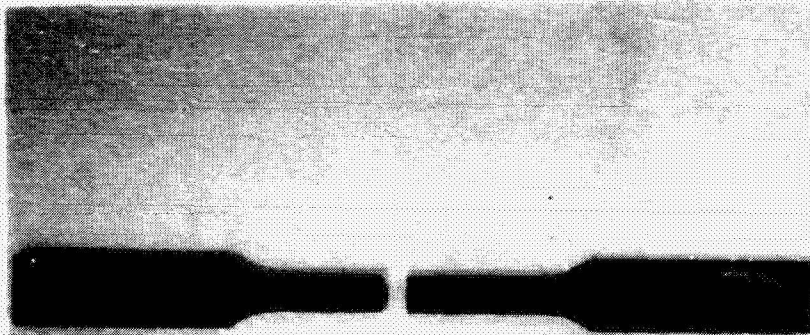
Failed 5245-C Tension Specimen Tested at 121°C, Dry. It Will Be Noted That the Failure is Straight Across the Specimen.
